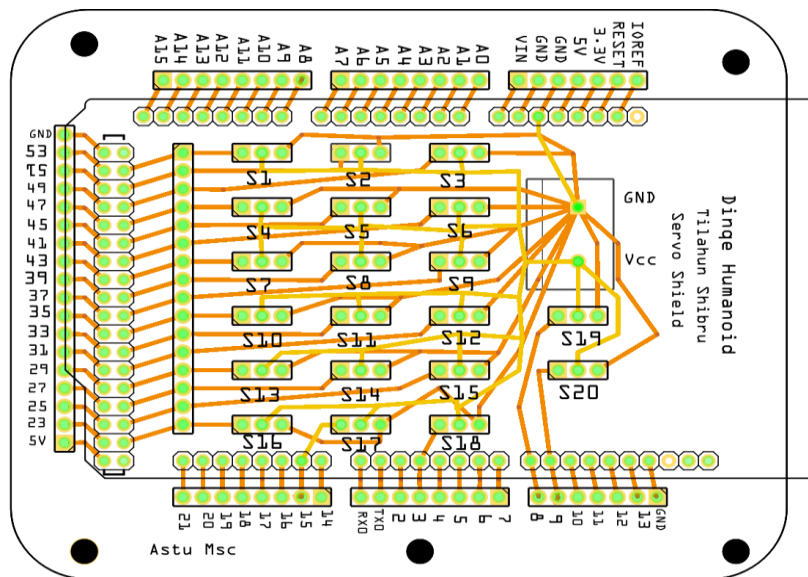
Electronics parts and PCB assembly design of Dinkinesh biped humanoid robot
